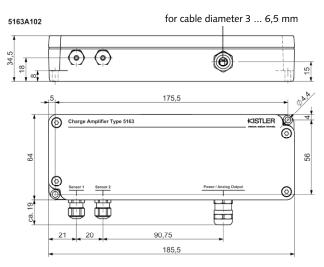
Dimensions of charge amplifier Type 5163A102 with cable gland
